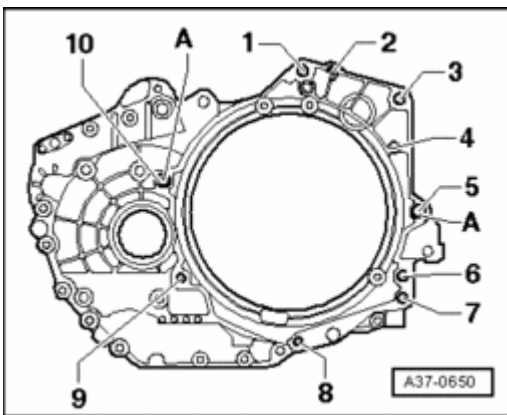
Identifying Bolts On Engine/Transmission Flange
